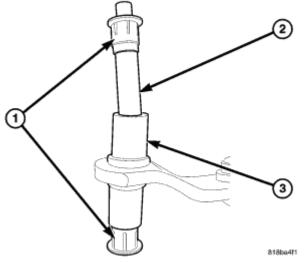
Pedal Bushing Courtesy of CHRYSLER LLC
